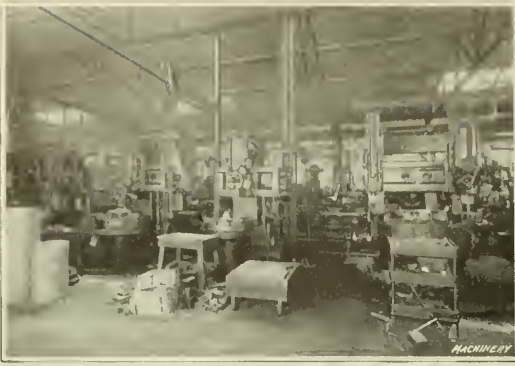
Where proper care is taken in laying out shop equipment, it will often be possible to group machines so that one jib crane and trolley will be able to serve a number of machines. In this illustration a view is shown in the Gisholt Machine Co.'s factory, where one jib crane is able to serve as many as five machines
